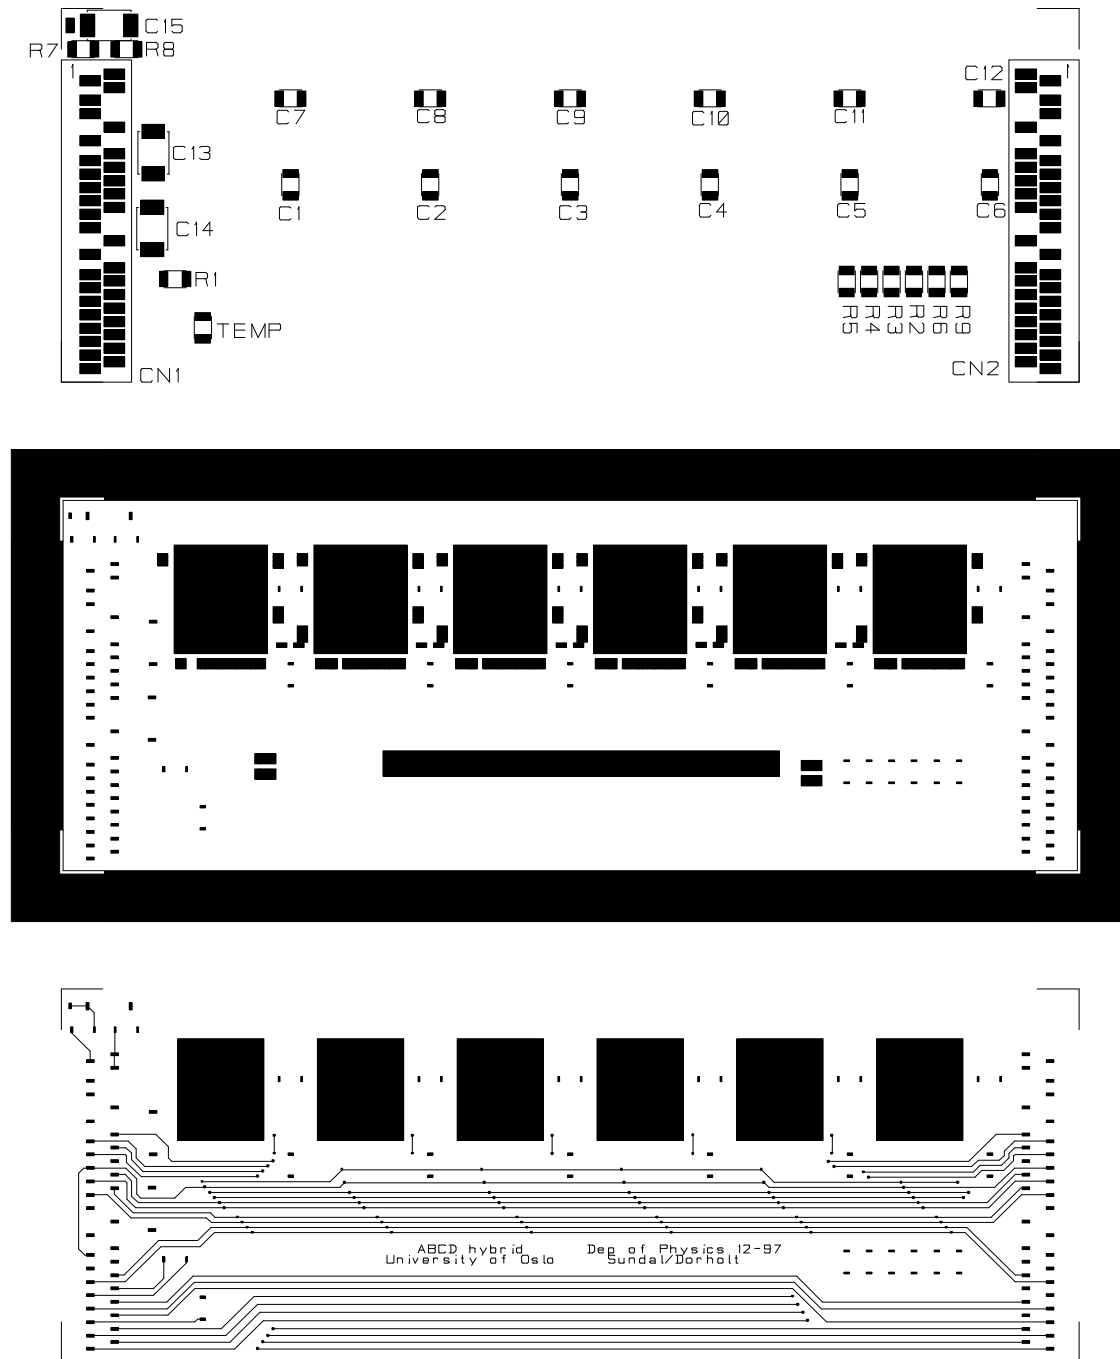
BeO hybrid for the ABCD chip. The first plot shows the solder pads with component names, the next layer is the insulation between solder pad and top routing layer and the bottom plot is the top routing layer.
